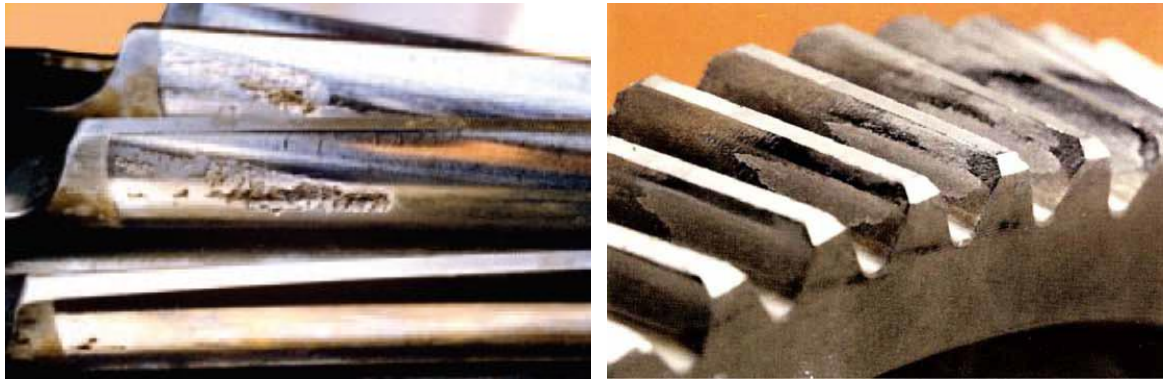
Macropitting [25] (left) and Micropitting [26] (right) Damage to Tooth
